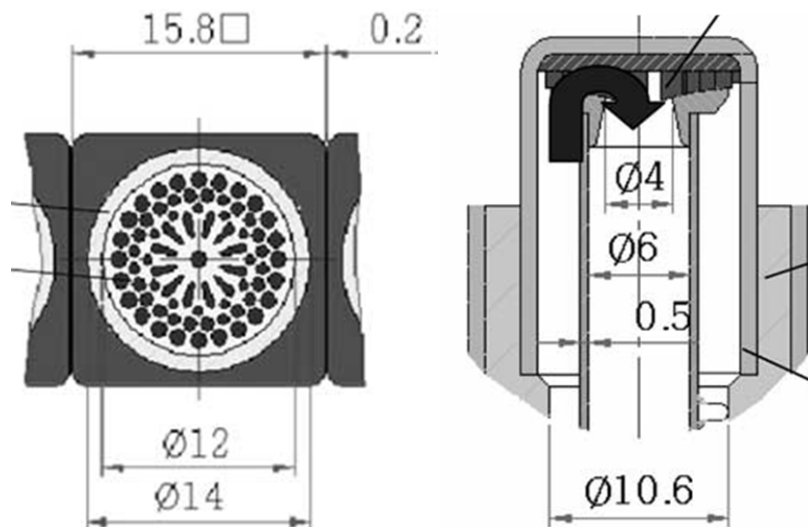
HEMP concept pin geometry aerial view (left) and cross-sectional view (right); dimensions in mm [15]
